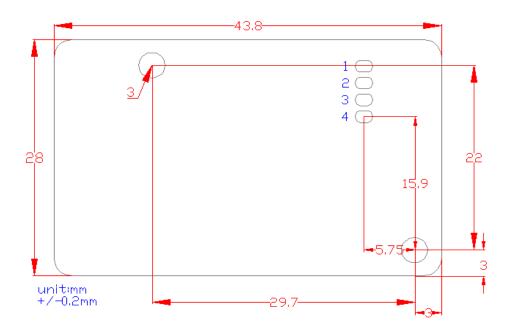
The Physical Dimensions CLOUD-ESP-01-35 MACHTALK Wi-Fi Module
